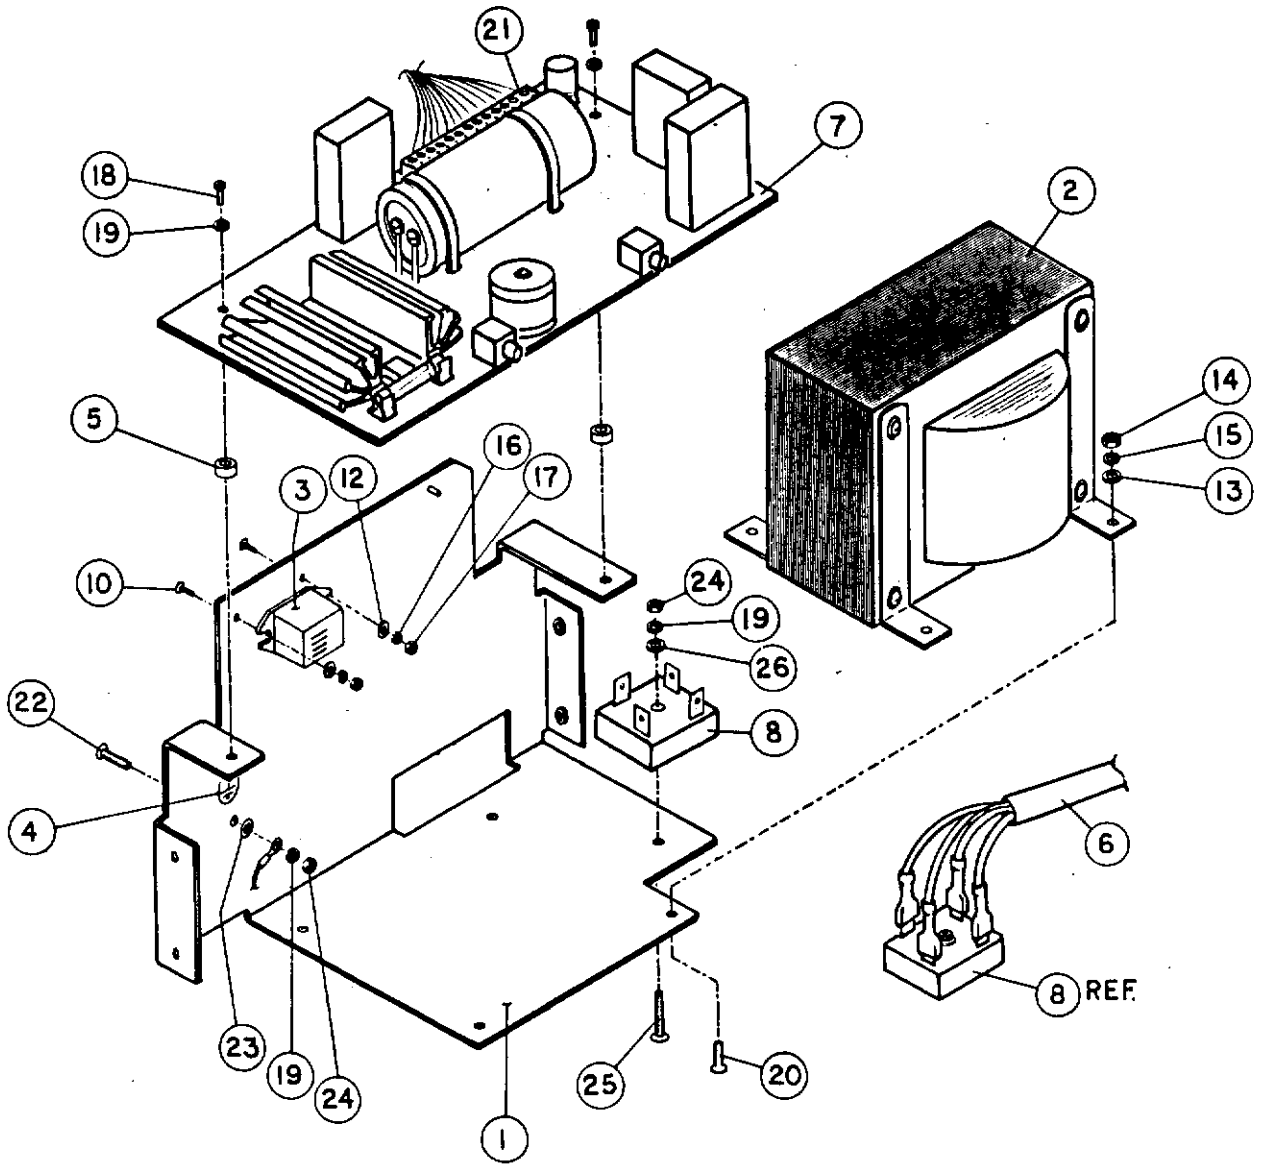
PARTS LOCATION DIAGRAM, BATTERY CHARGER ASSEMBLY
